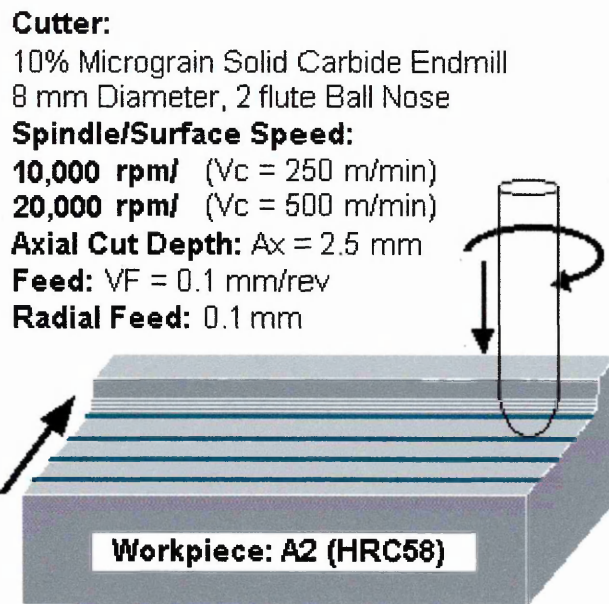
Schematic diagram showing dry high-speed milling parameters (MAZAK FJ 25 machine tool)
